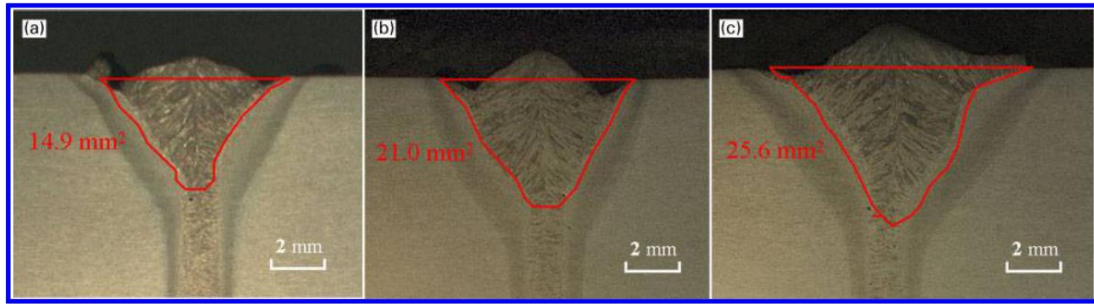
Cross-section morphologies of joints welded with different arc types: (a) GMA pulse; (b) GMA normal; (c) modified spray arc. Reprinted with permission [28]. Copyright 2014, SAGE Publications.
